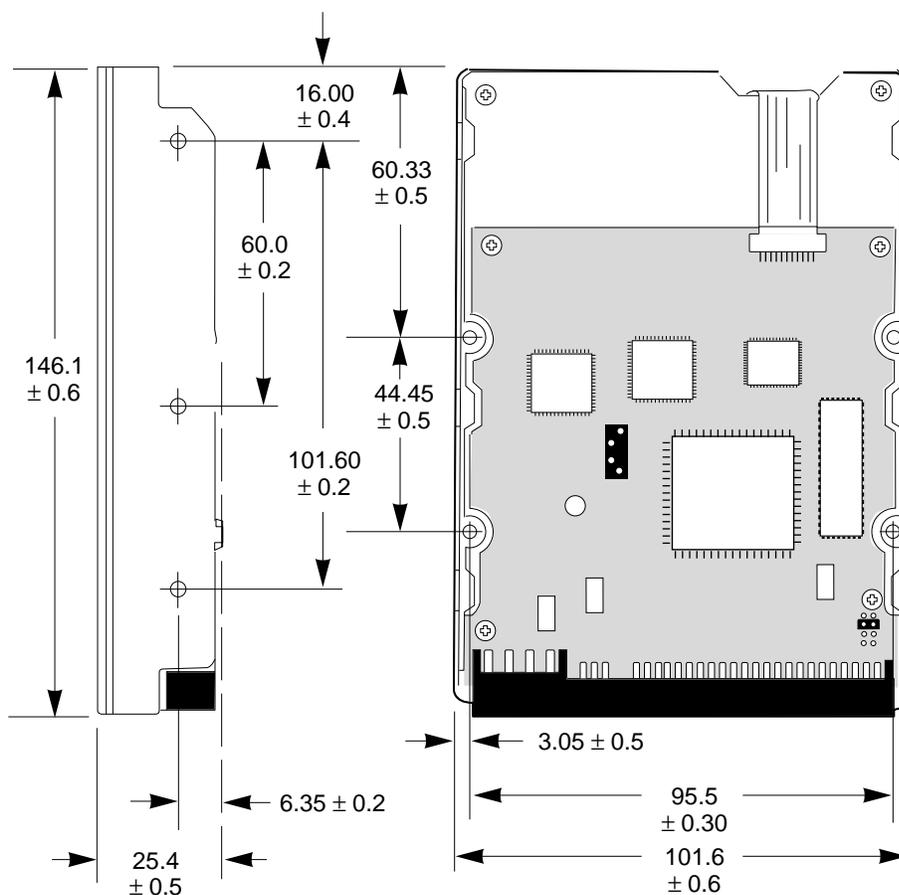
Mounting Dimensions for Quantum Fireball TM (One-Disk) Drive
